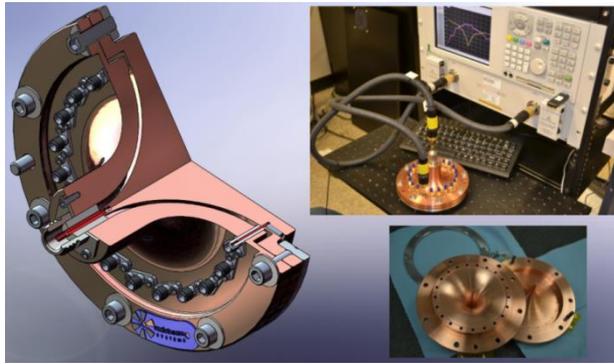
[LEFT] combiner/divider CAD model, [RIGHT] testing the prototype device and the prototype disassembled.
